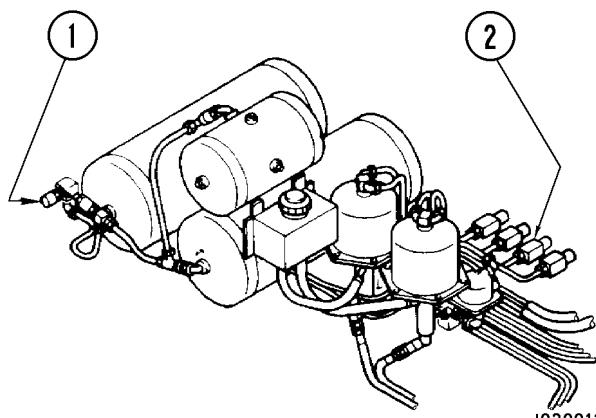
RELEASING EMERGENCY BRAKE
